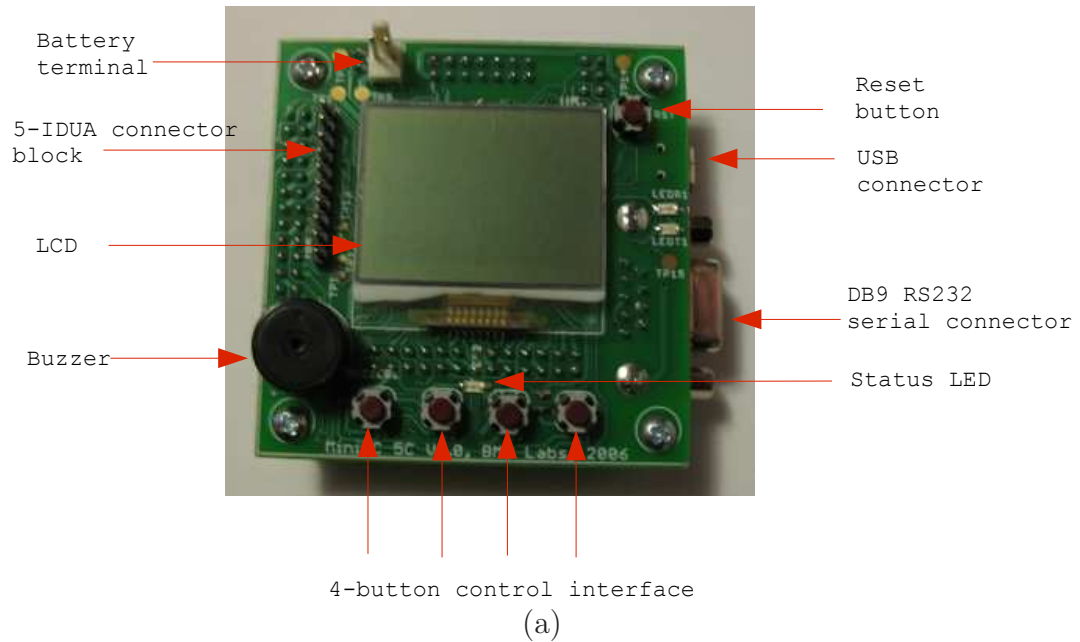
Assembled miniEC circuit board showing the positions of some of the major components. The overall board dimensions are 66 by 66 mm.
